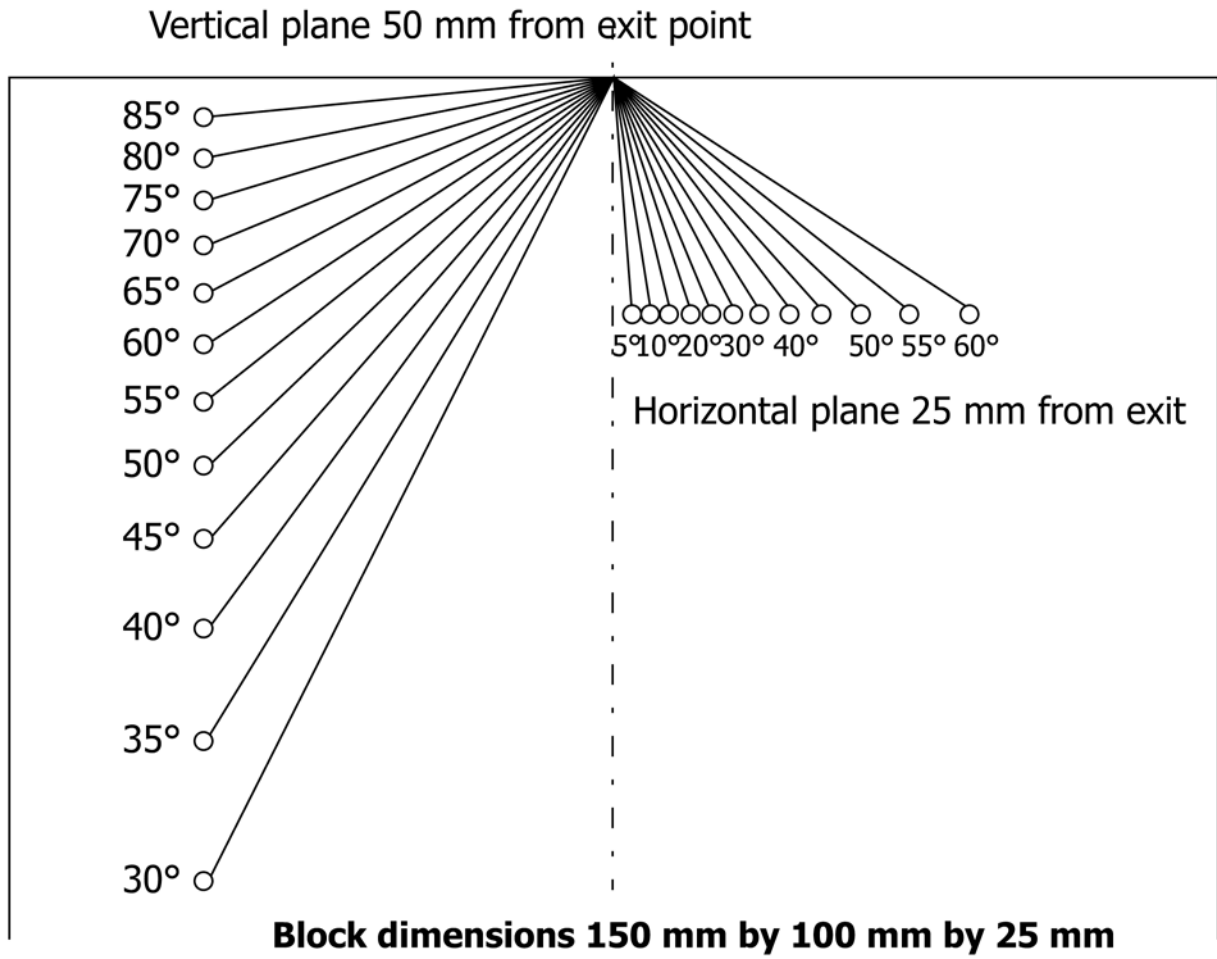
Beam Steering Assessment Block—Single Plane
